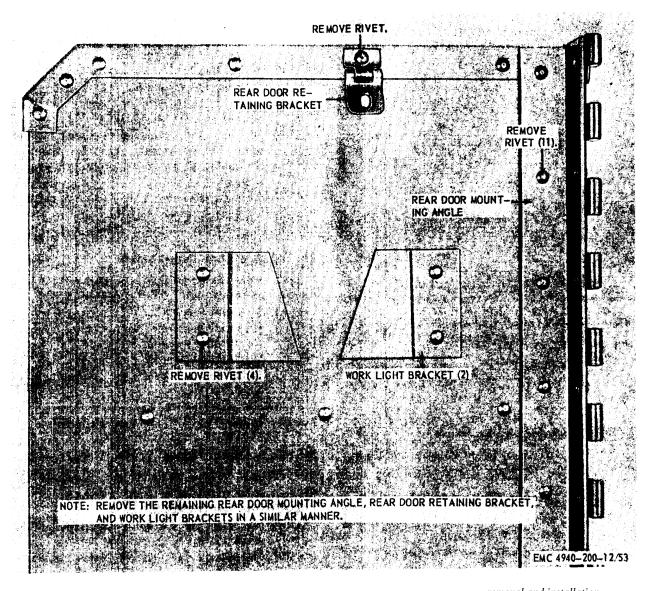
Rear door mounting angle, war door retaining bracket, and worklight brackets, removal and installation.
